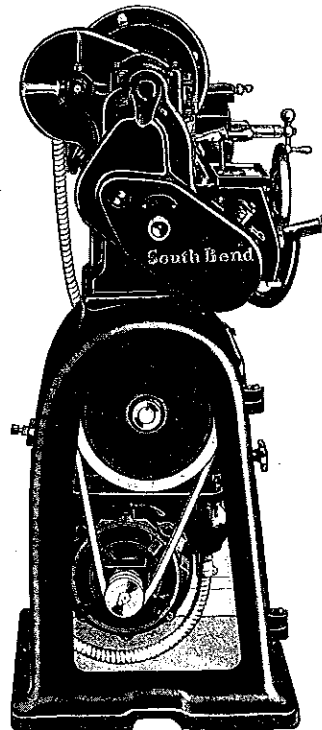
End view of lathe with end plate removed to show multiple "V" belt drive from motor
